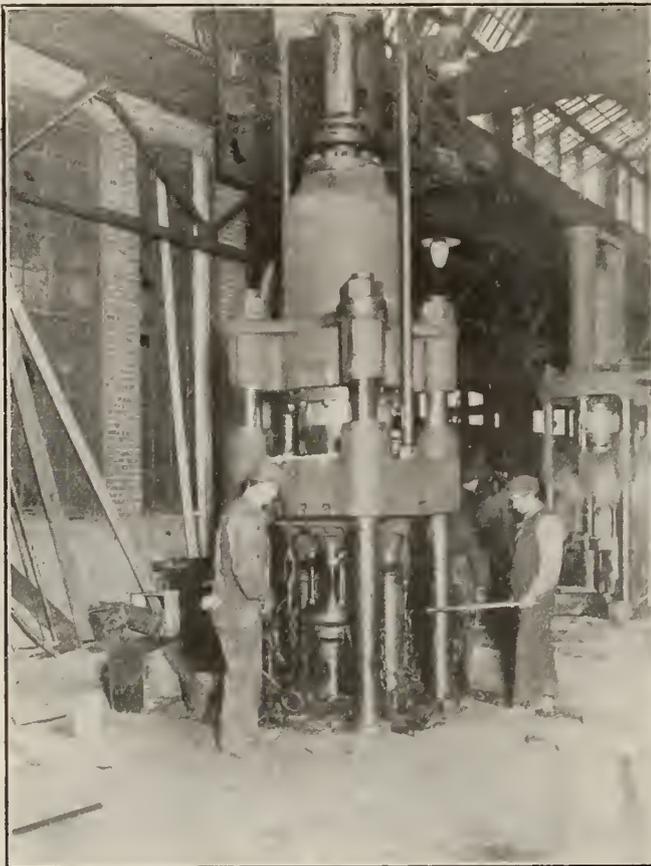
TON R. D. WOOD HYDRAULIC PRESS PERFORMING FIRST OPERATION ON 18-POUNDER SHELL FORGINGS.
